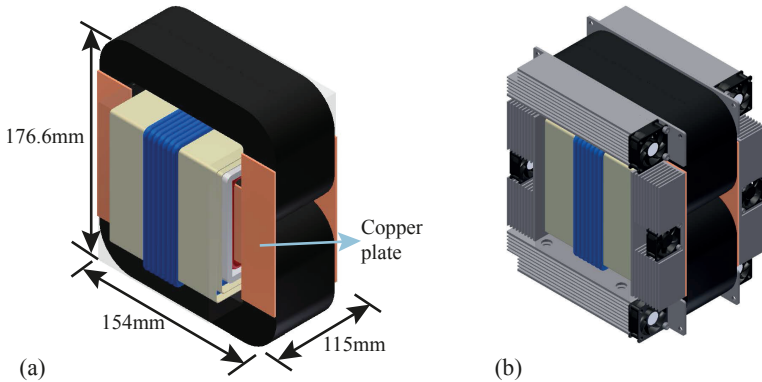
CAD drawings of the optimal MFT design: (a) without heat sink, (b) with heat sink and fans.
